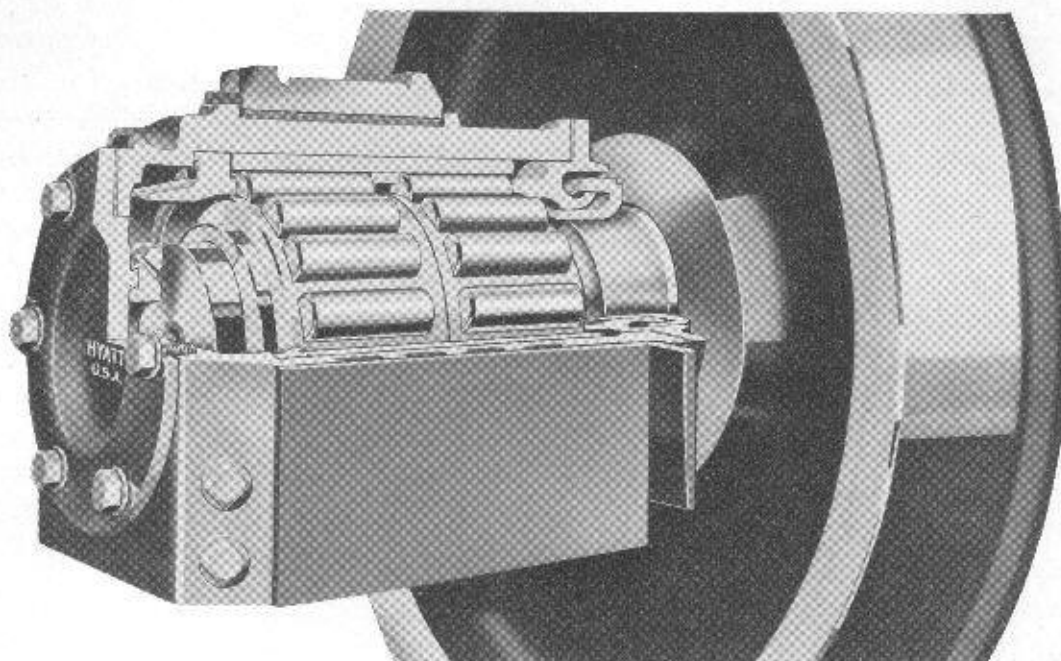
Type JM Hyatt Roller Bearing Railroad Journal Box.
